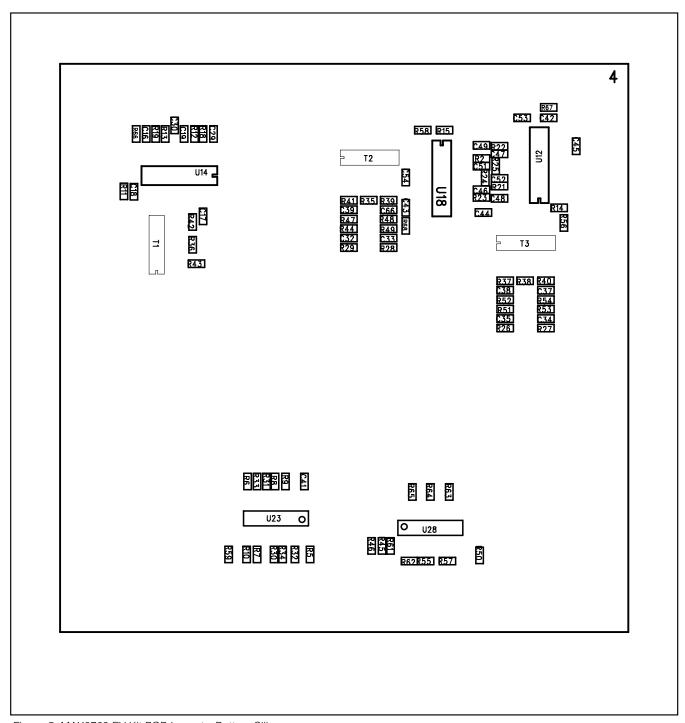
MAX2769 EV Kit PCB Layout—Bottom Silkscreen
